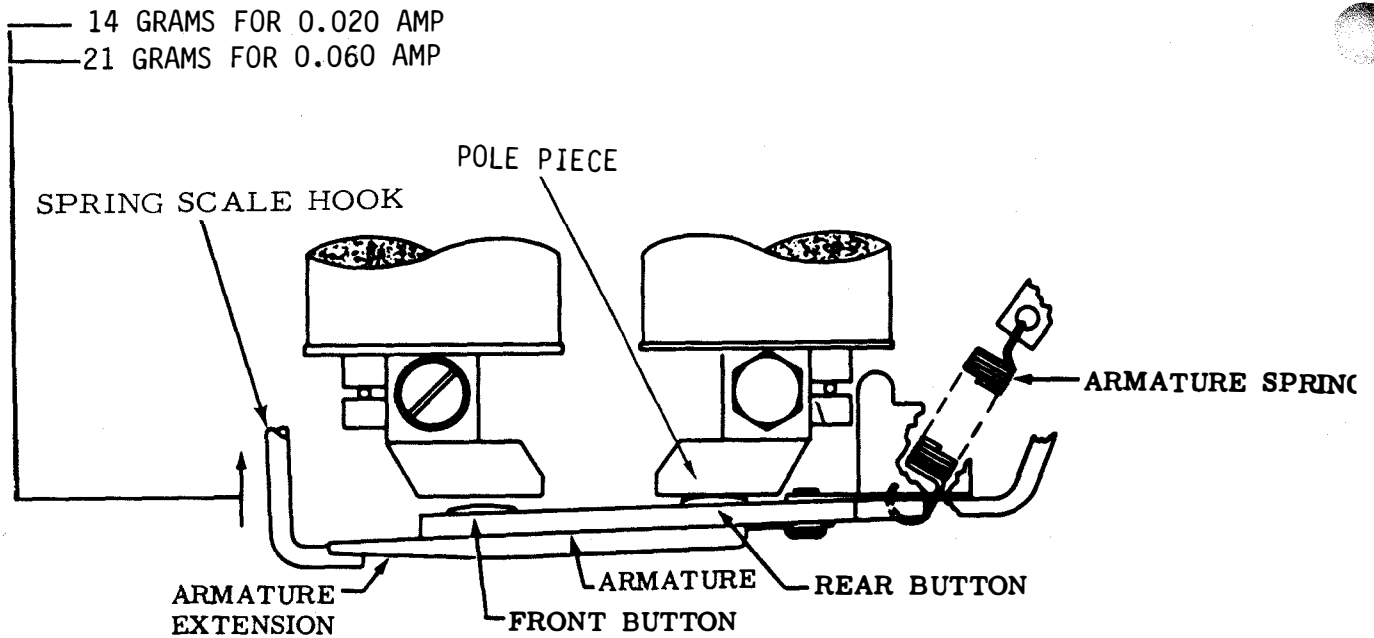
Selector Armature Spring (Double-Button), Right Side View
